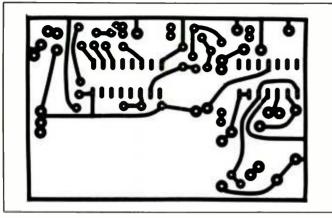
Actual-size etching-cnd-drilling guide for project's printed-circuit board.
